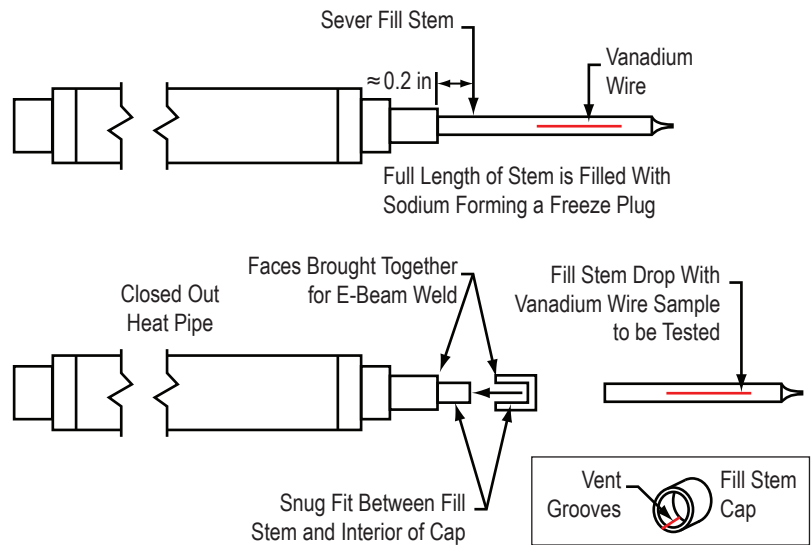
General fill stem cutoff and weld techniques for the cap method.
